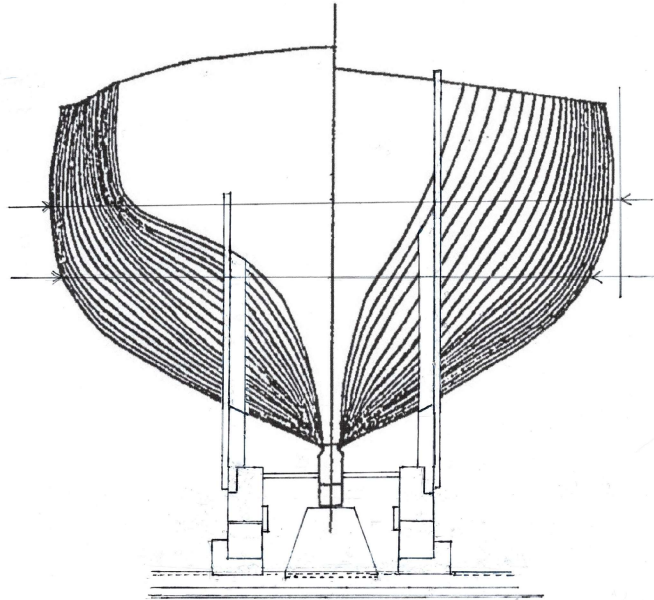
Sectional view of the hull, the cradle, the sliding ways, and the keel stocks
